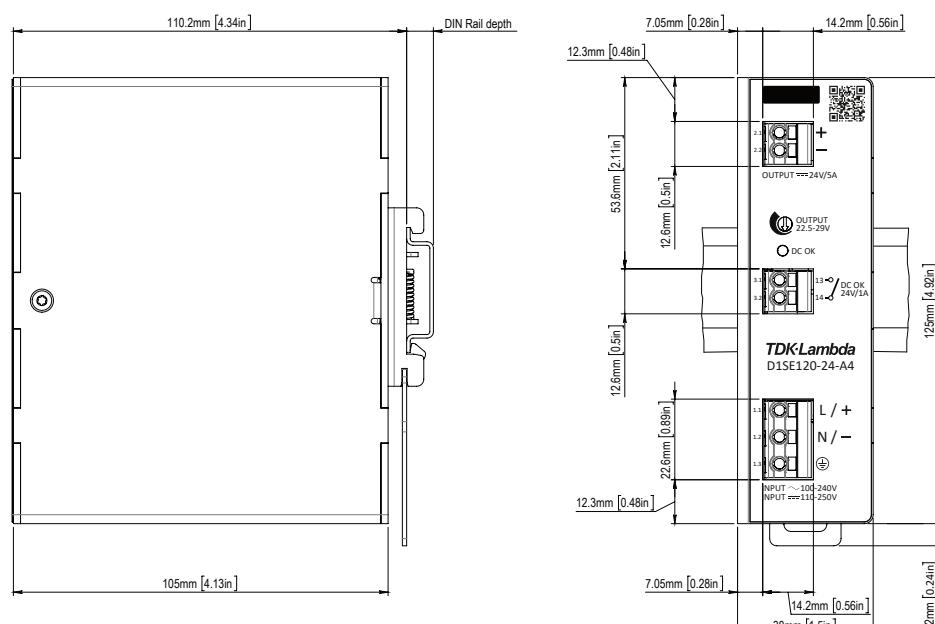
Dimension drawing of D1SE120-24-A4/A5
